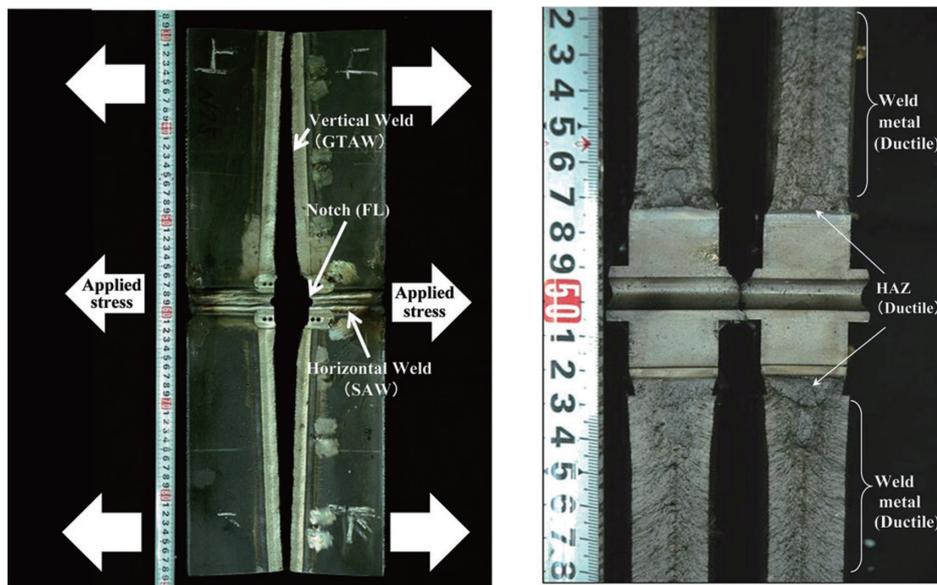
Fracture path and fracture surface of cross weld notch wide test (Heat A, 25 mm)
